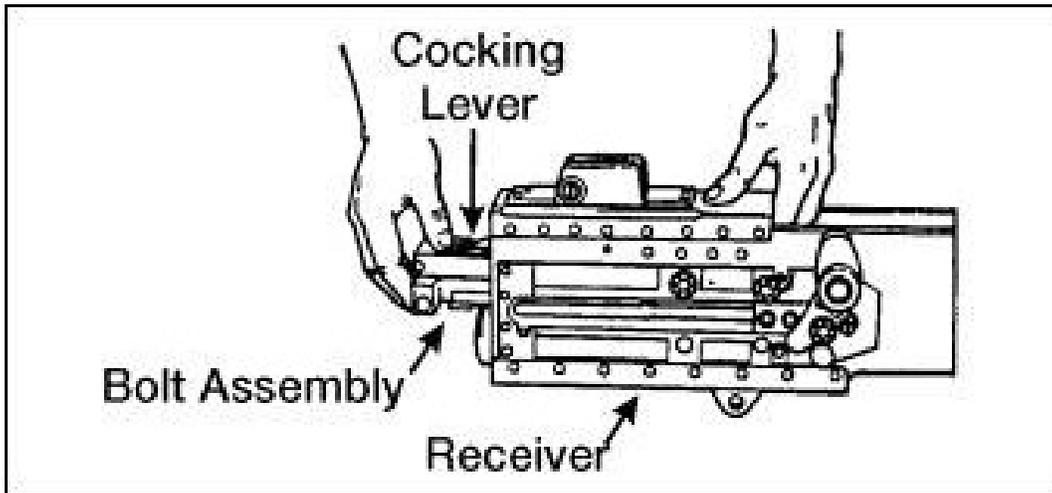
ST-1025_38 (Installation of the bolt assembly)
